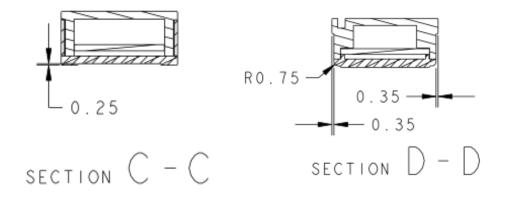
QSFP-DD1600 Improved thermal design module (bottom and sides views details)
